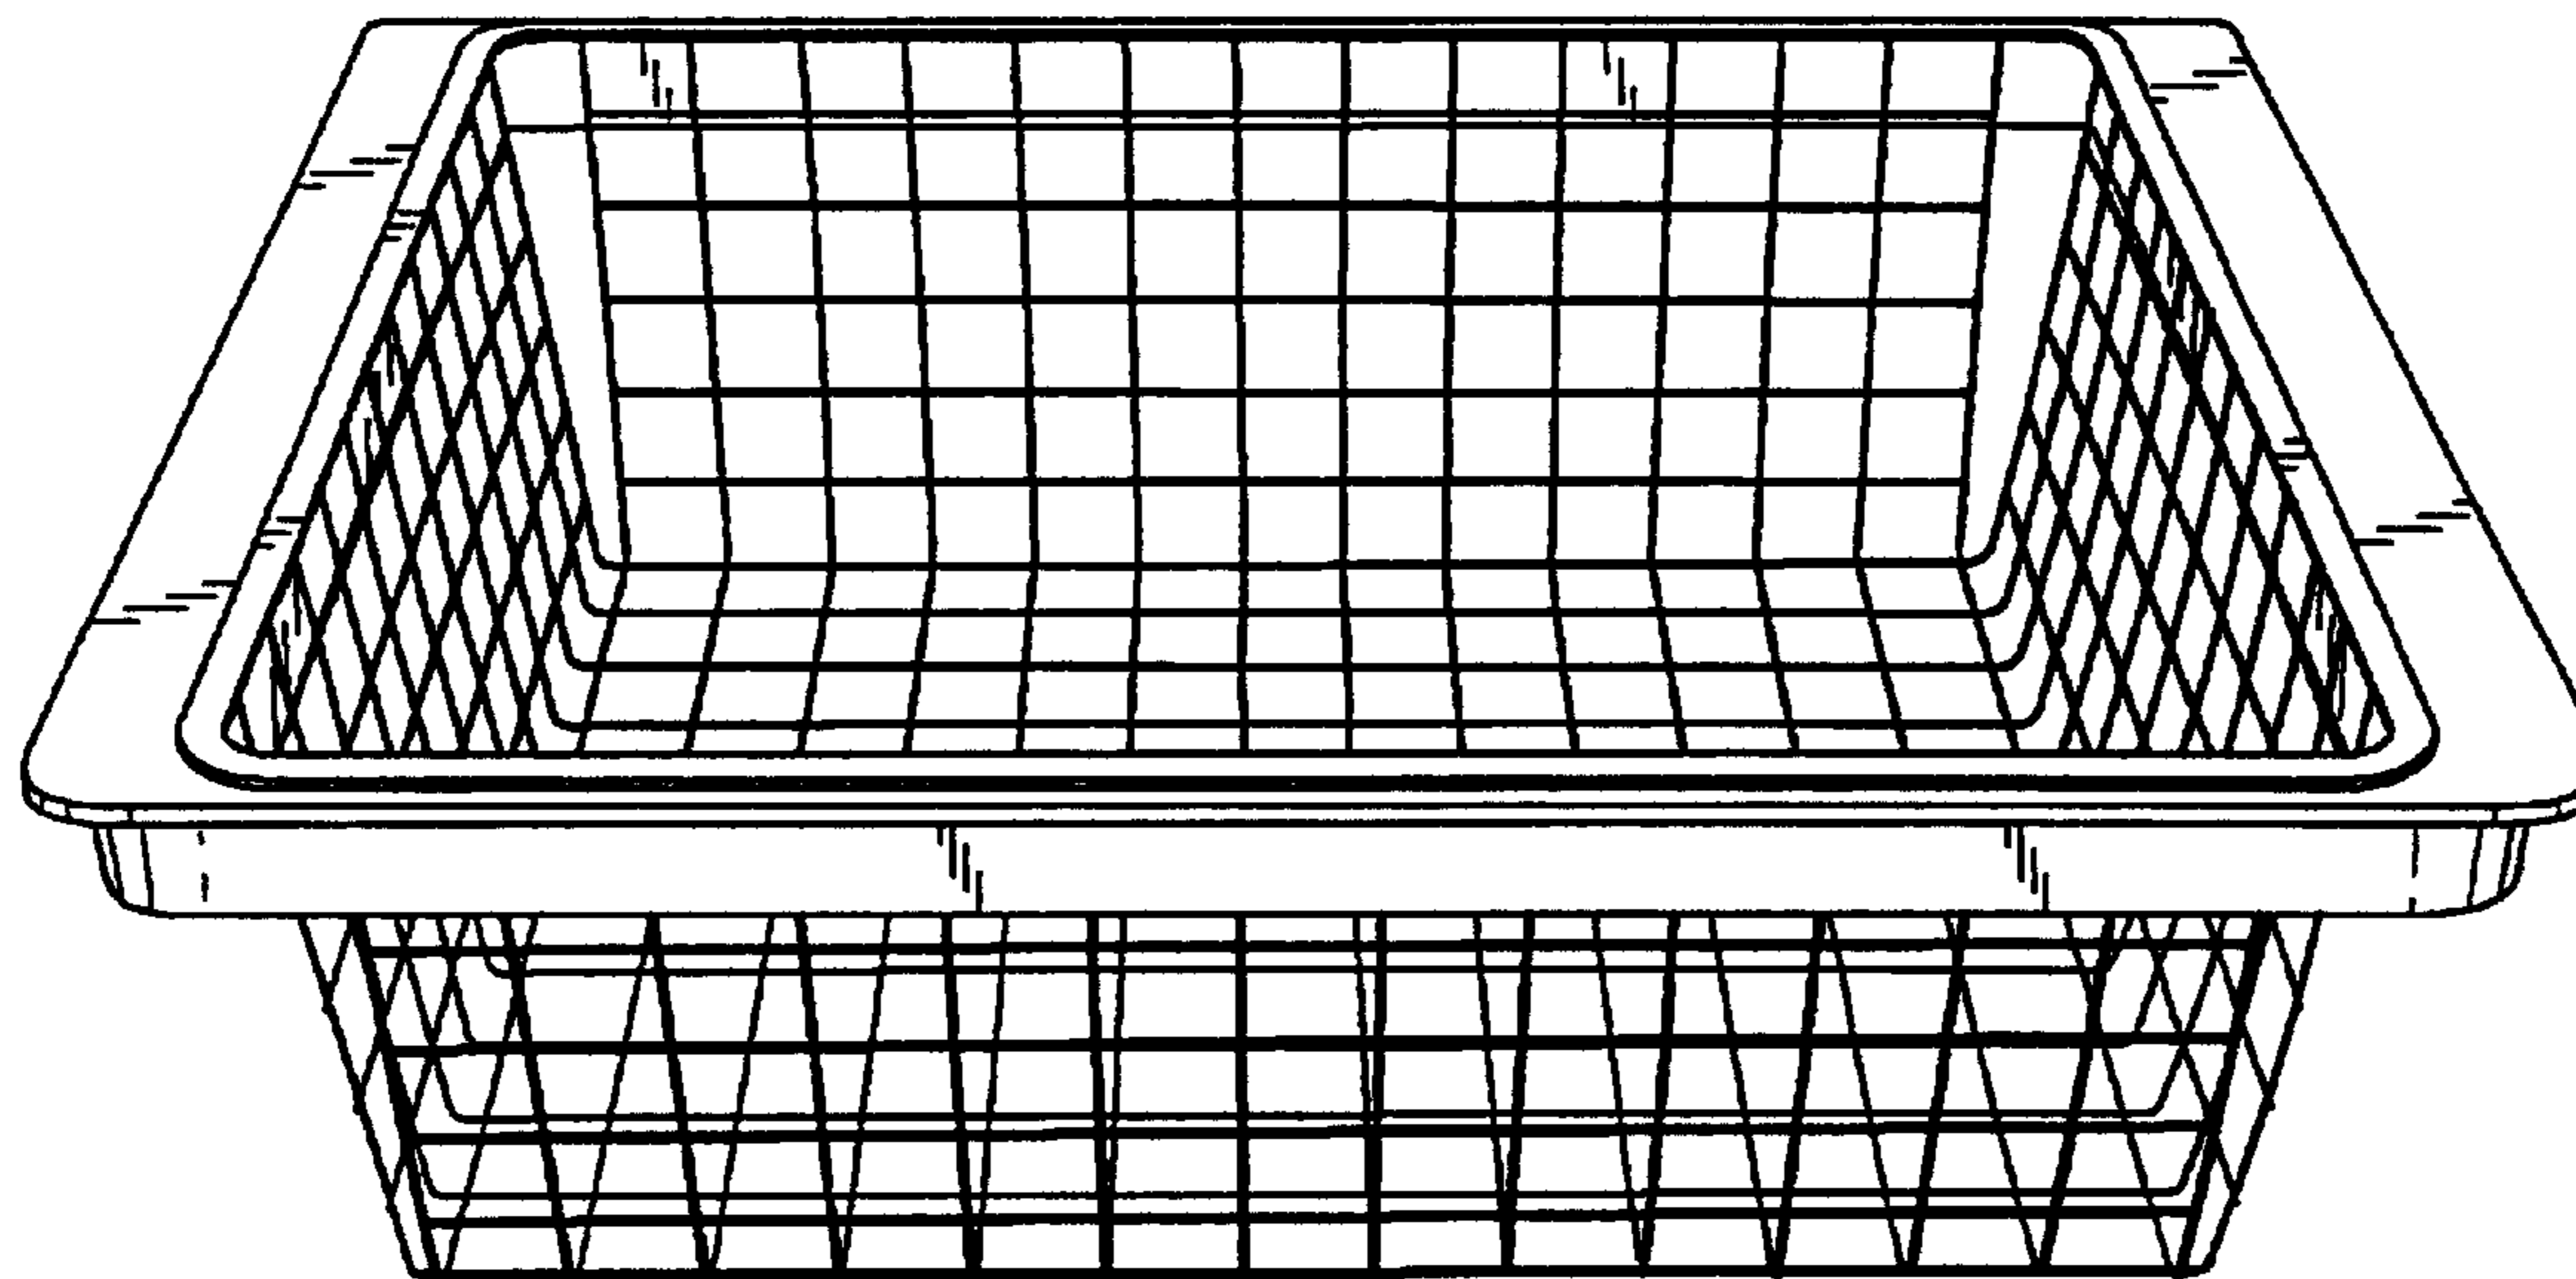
is a bottom, front, side perspective view thereof; the other side being a mirror image.
